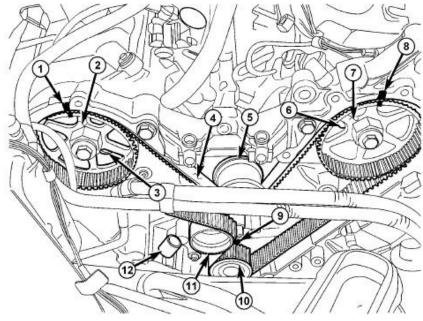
TIMING GEAR MARKS Courtesy of CHRYSLER LLC
